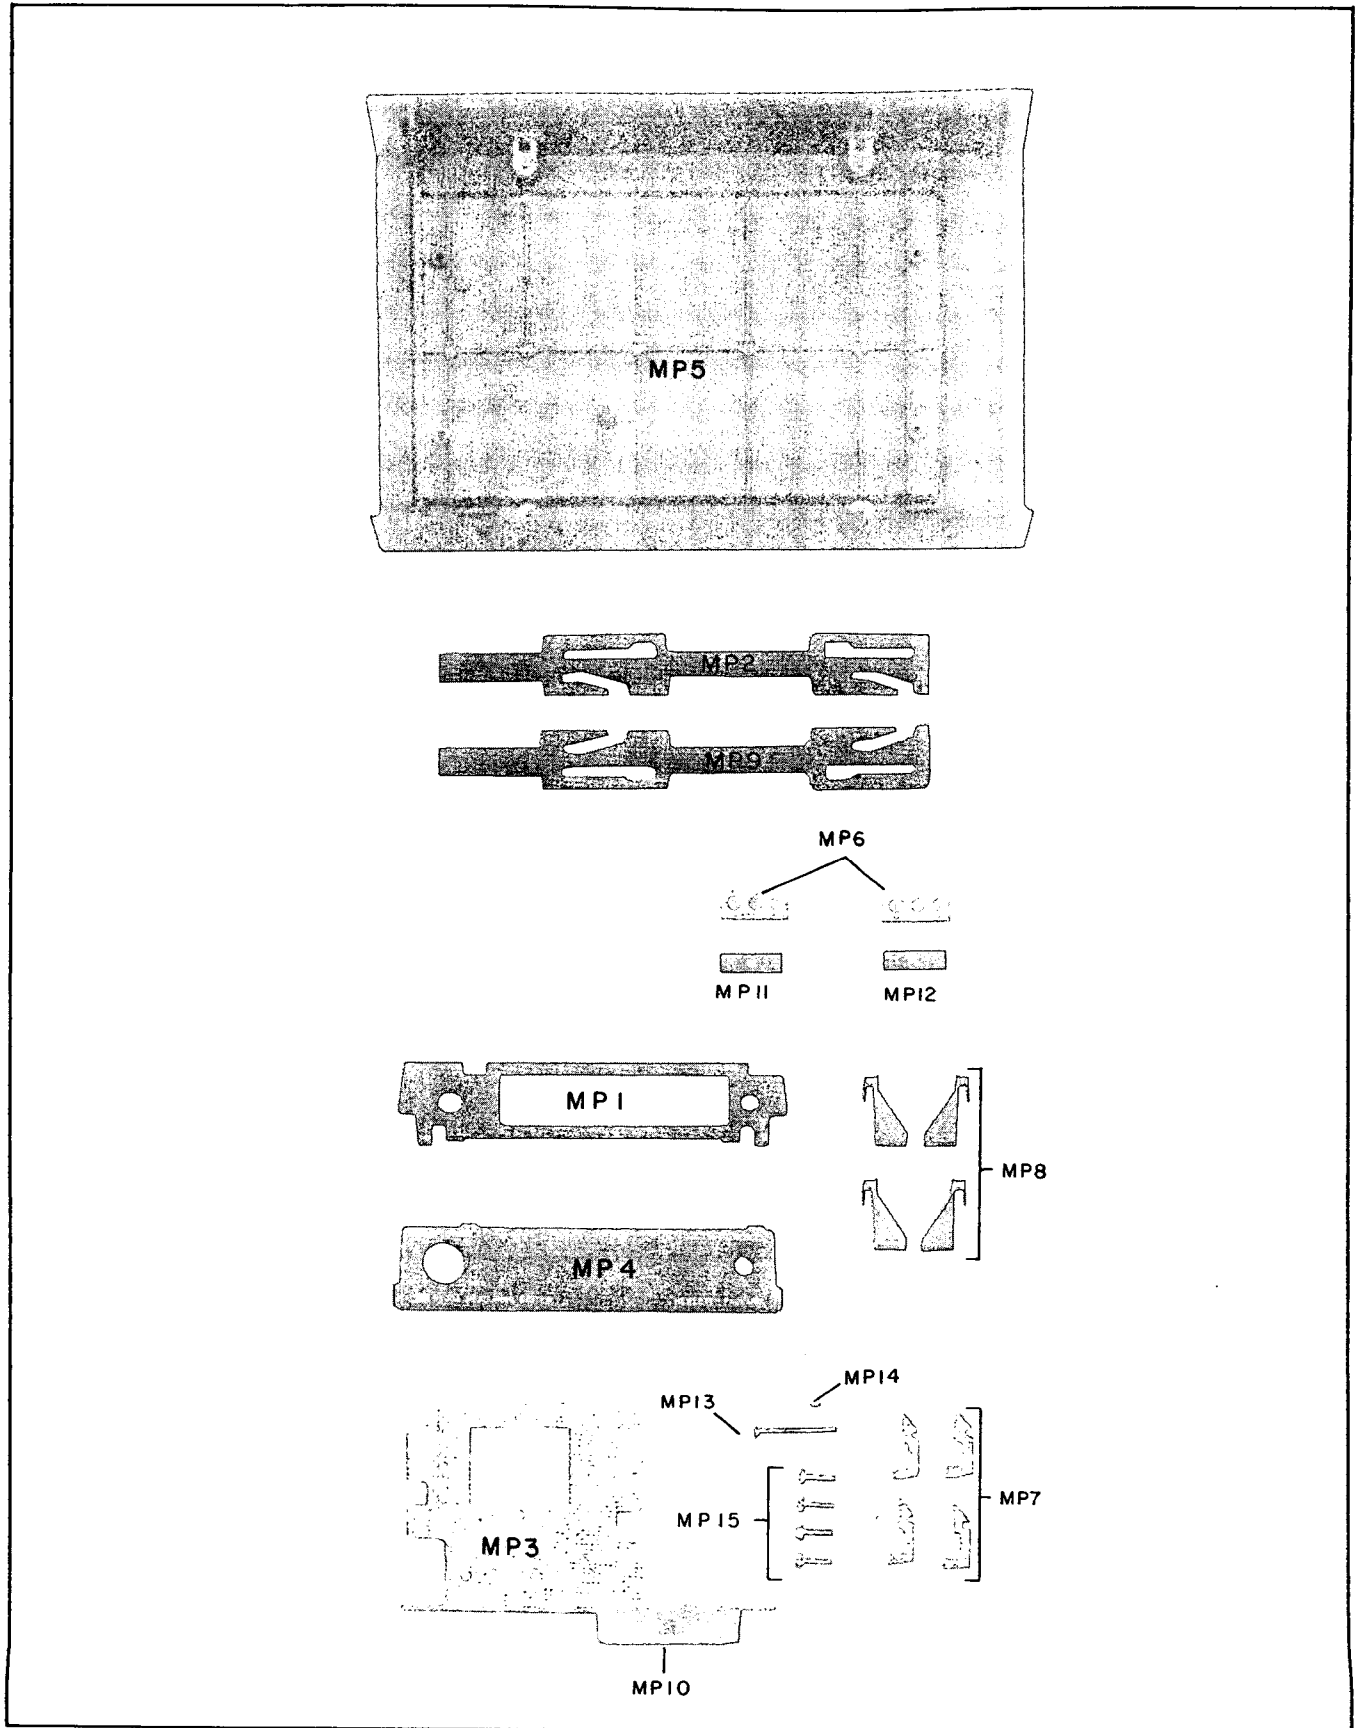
5310A Battery Pack Mechanical Parts Location
